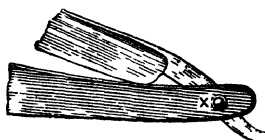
Razor with Side Fall, showing where Rivet should be Tapped
